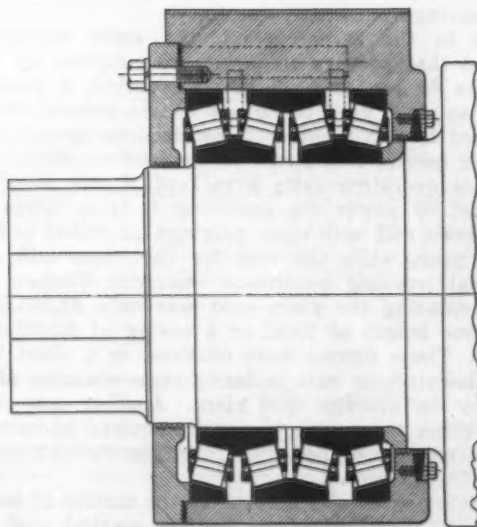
Section of Chuck and Bearing Developed for Use on Roll Necks
